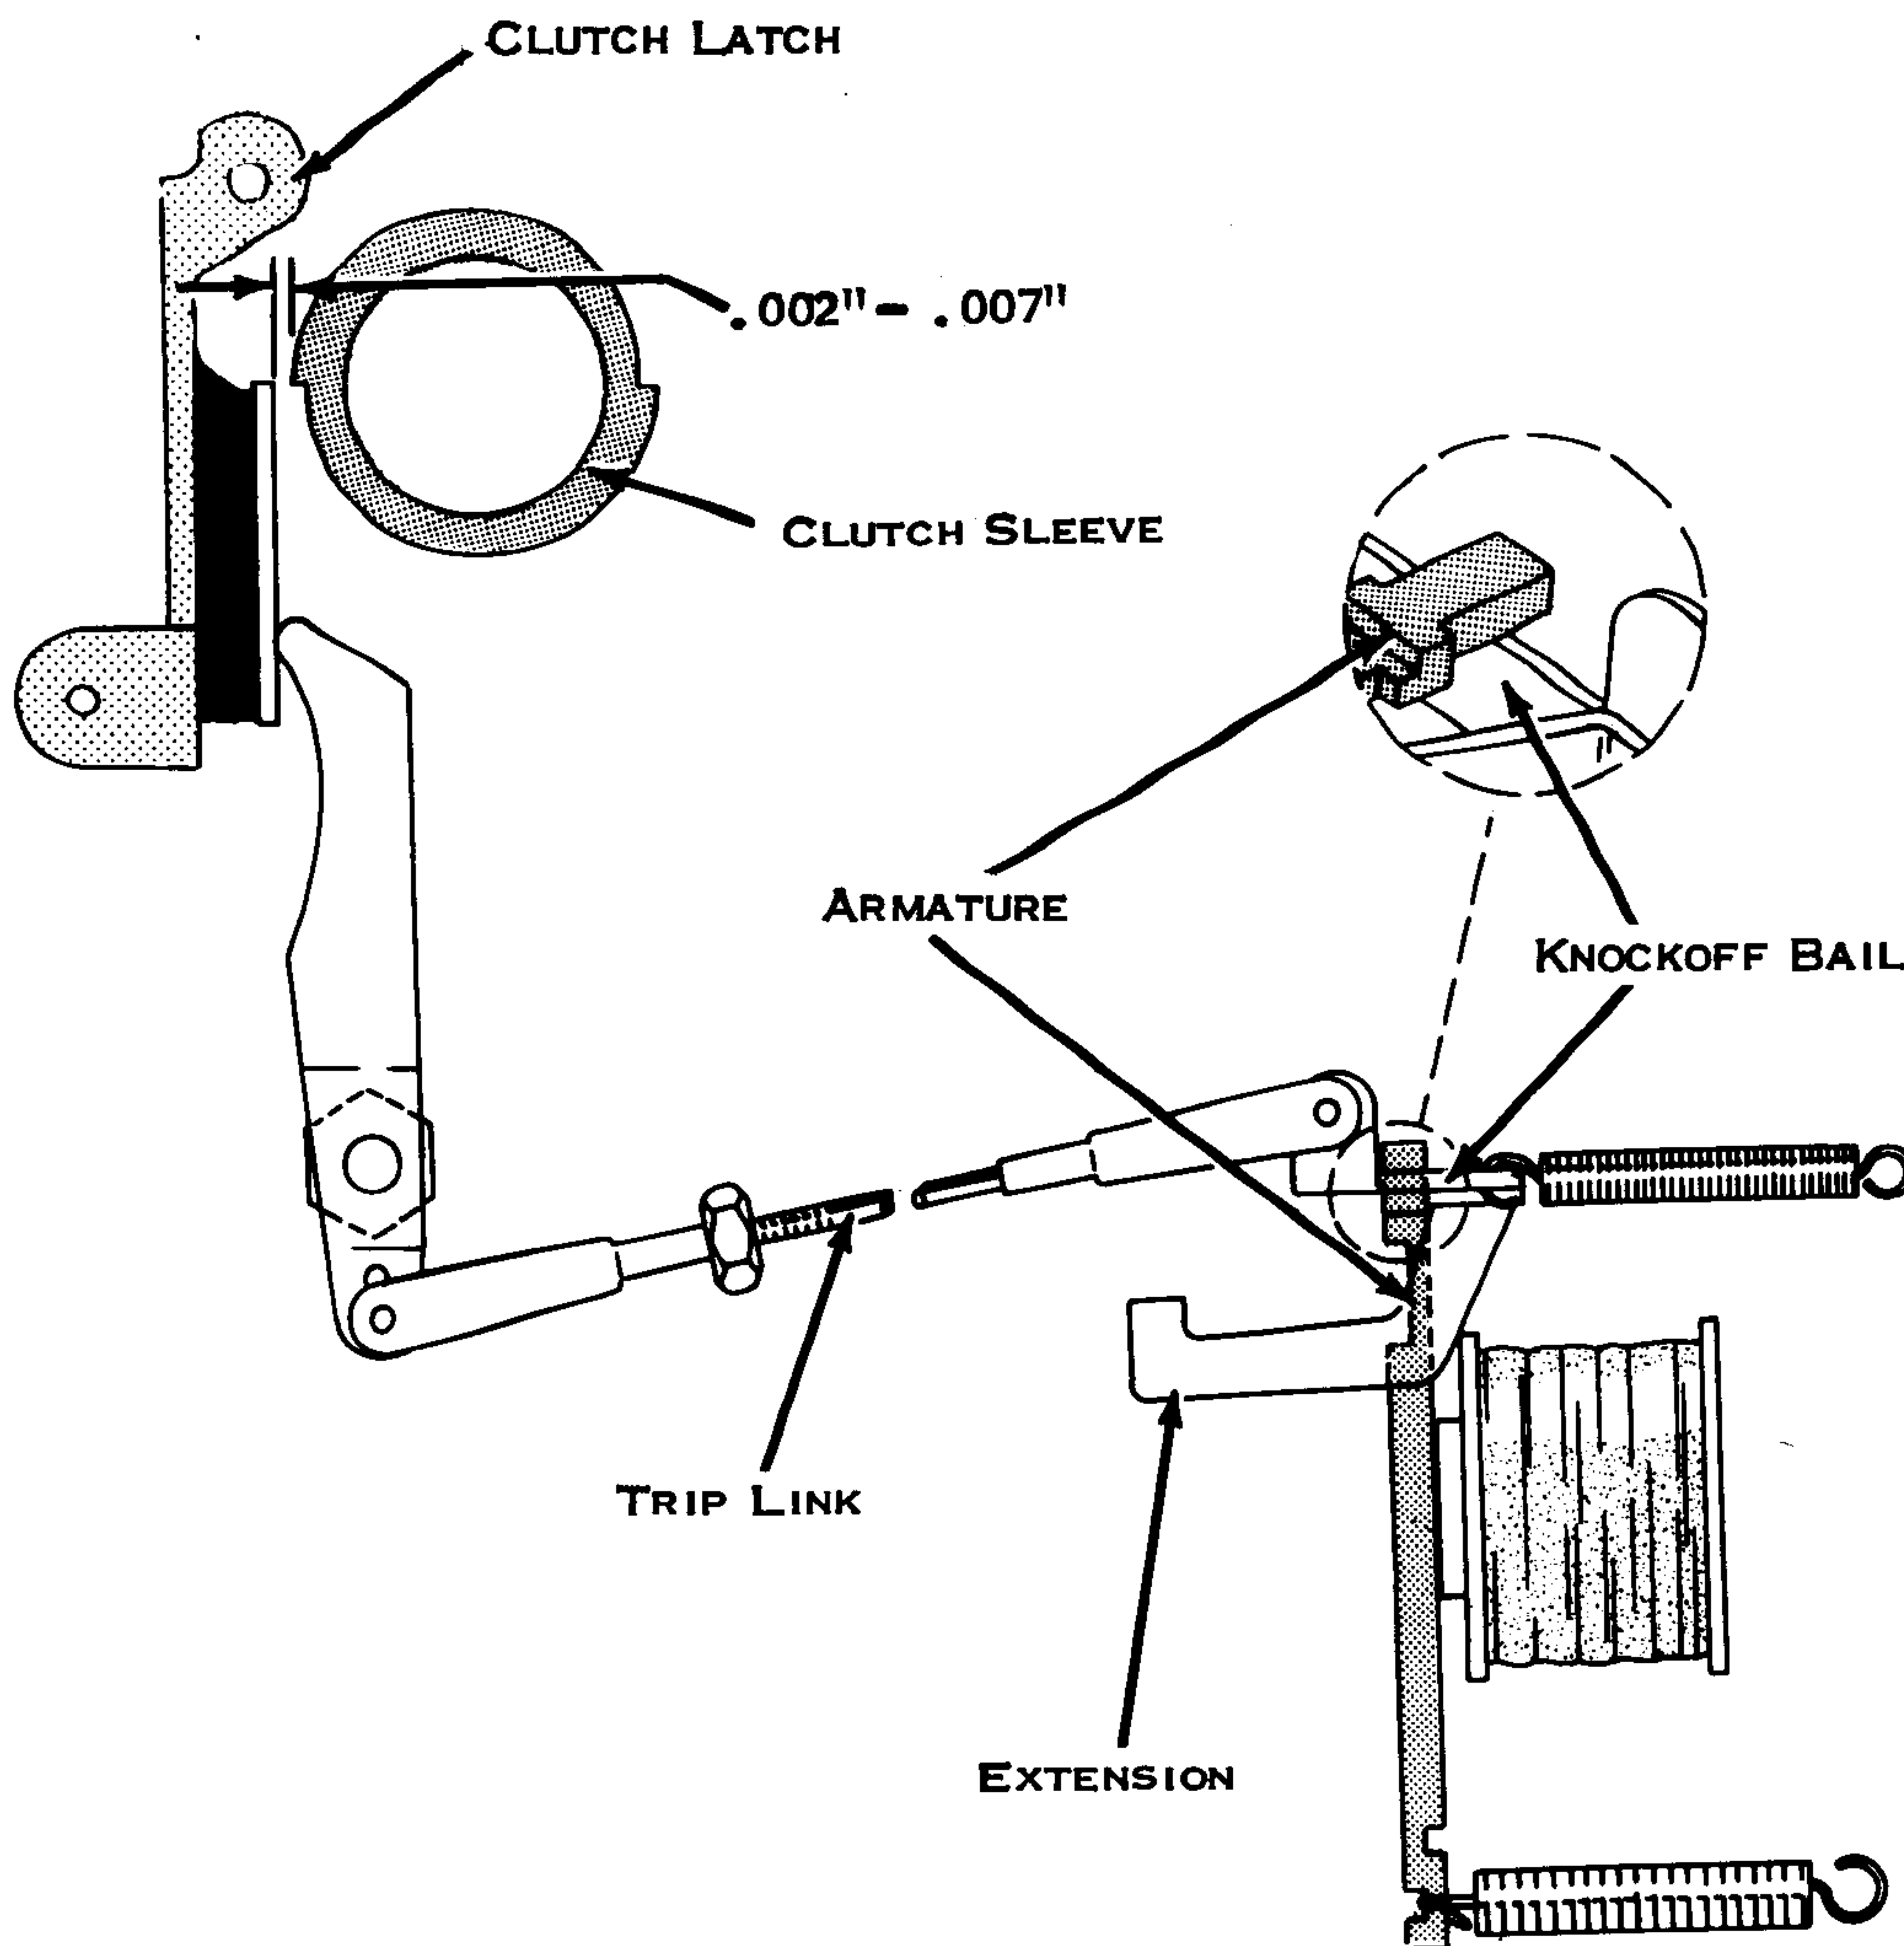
Old-Style Cycle-Clutch Trip-Link Adjustment
